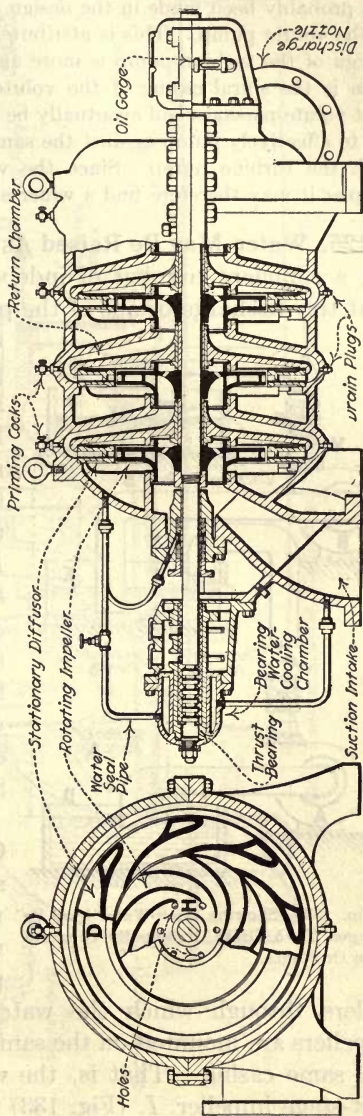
Sectional Views Of Turbine Pump, Showing Enclosed Impeller And Diffusion Vanes. (Alberger Pump And Condenser Co.)
